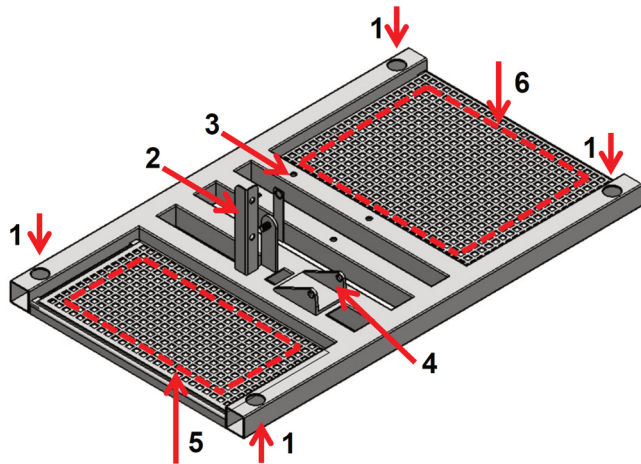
Support frame of the range extender: 1 – hole for mounting of damping elements, 2 – bracket of a rectifier bridge, 3 – hole for mounting an engine, 4 – bracket of a generator, 5 – area for mounting control devices, 6 – area for mounting an engine management system (in future)
